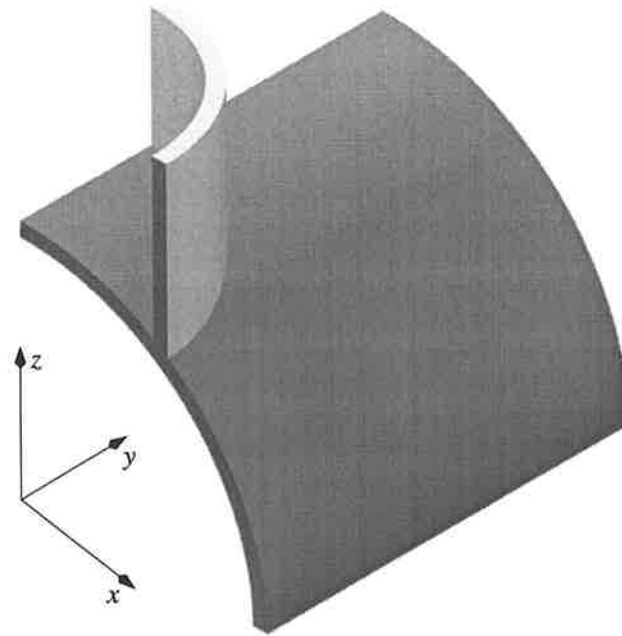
Quarter section of a typical branch on pipe weld.
